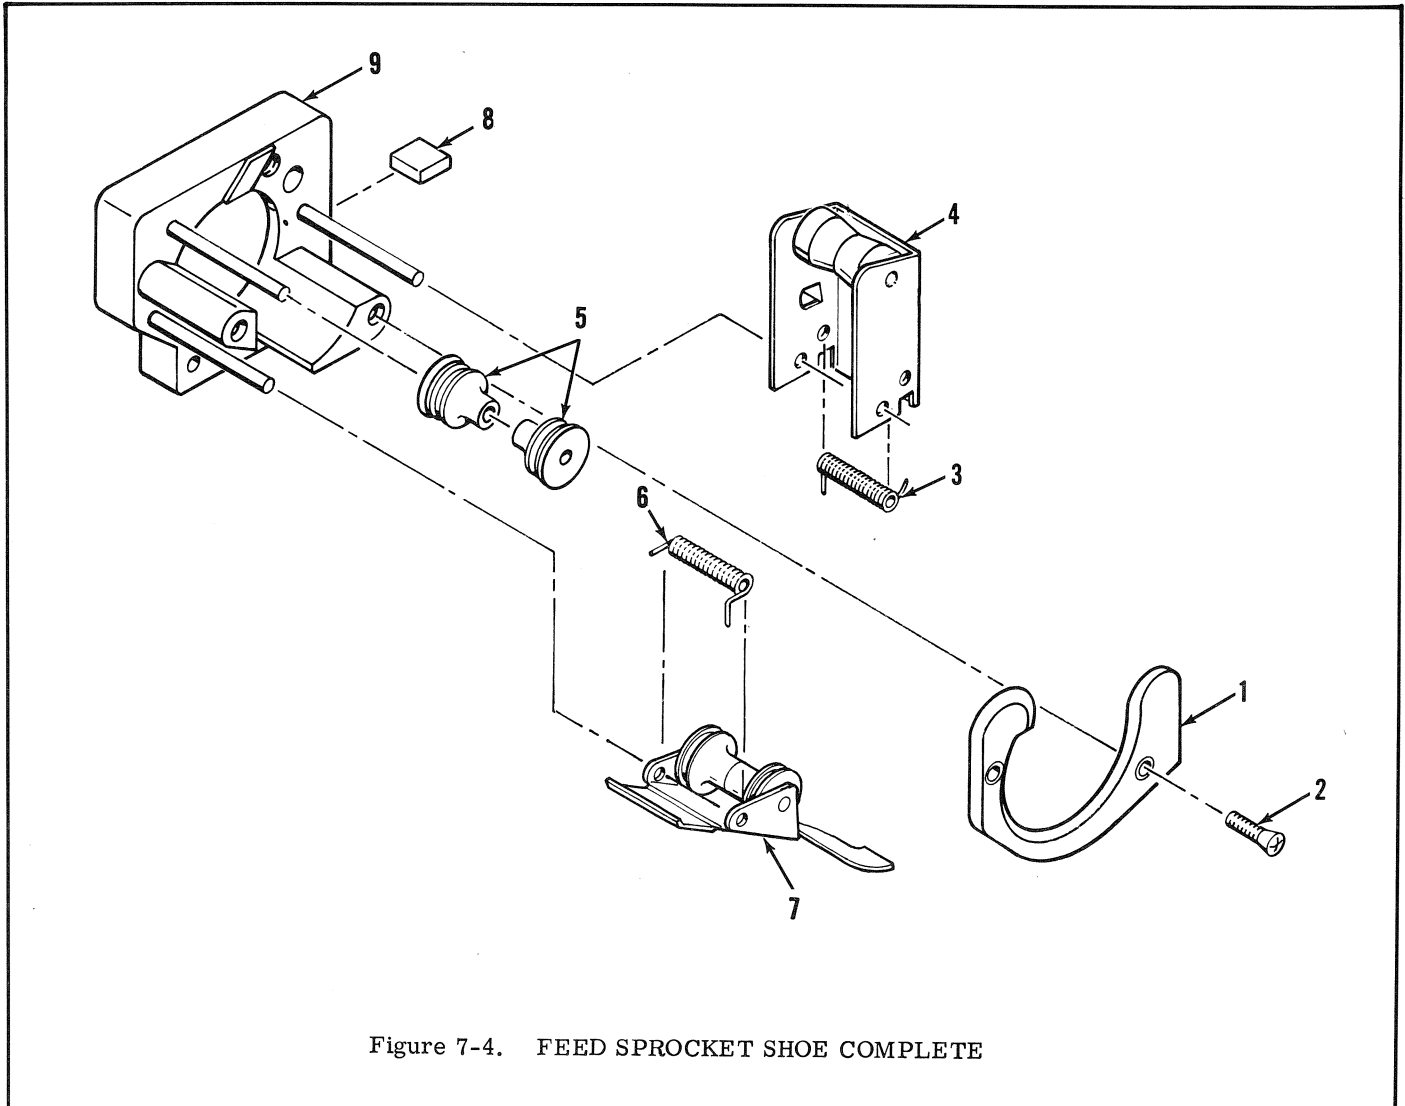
FEED SPROCKET SHOE COMPLETE
